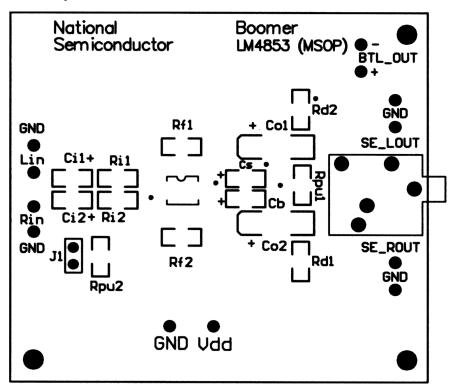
Recommended MM PC Board Layout: Component-Side SilkScreen
